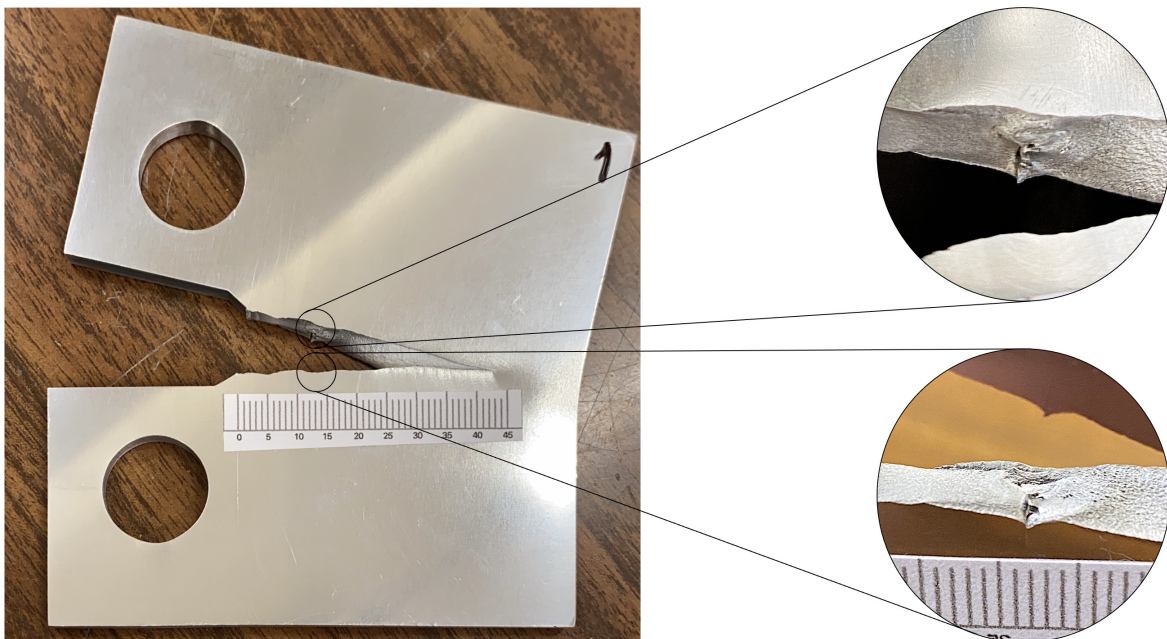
CT specimen with apparent defects in the welded joint
